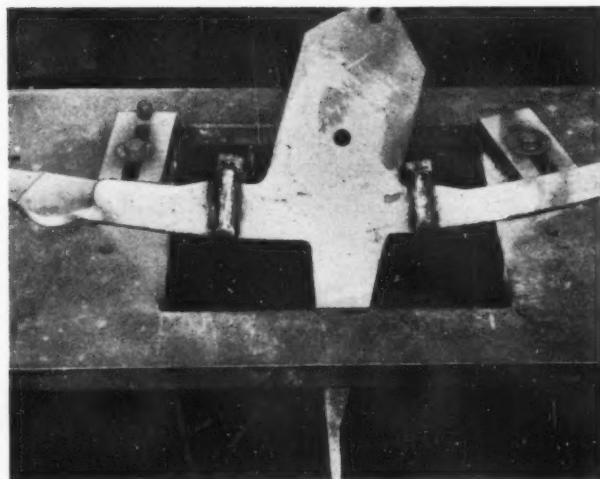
Close-up View of One of the Torque Segments Seen in the Background of Fig. 13. The Part is Held in a Trunnion-mounted Jig and the Backing Pieces have been Attached Prior to the Main Welding Operation, and are Machined away After Welding
